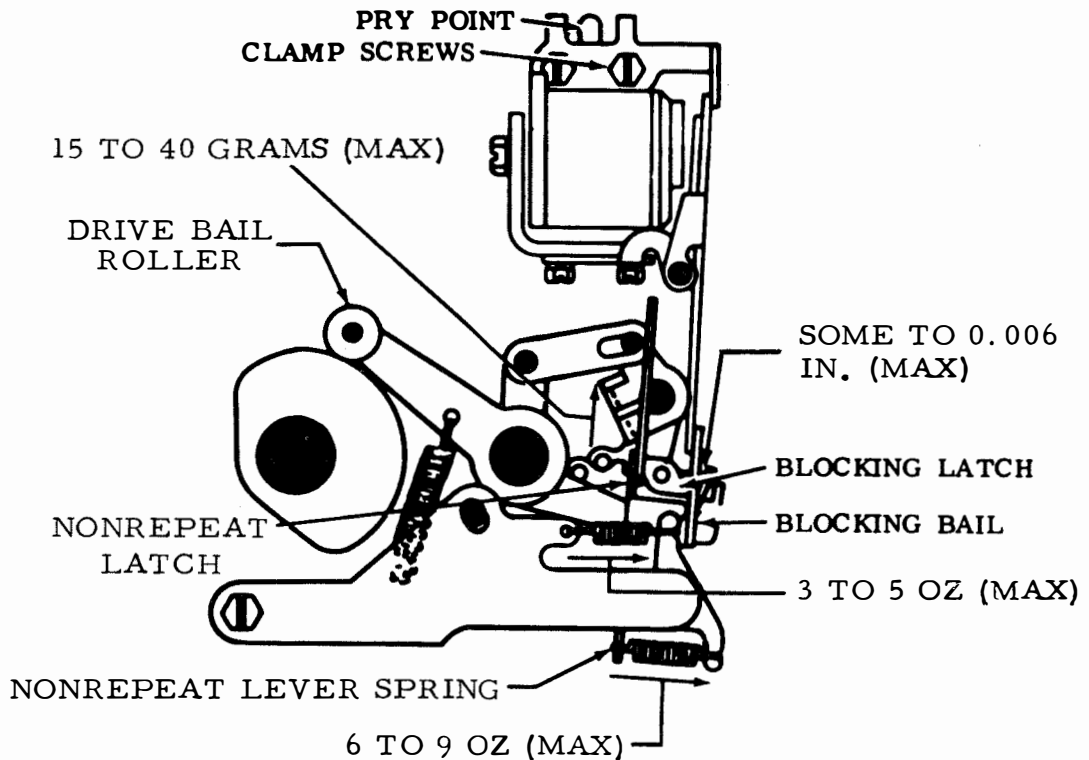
Blocking Latch Torsion Spring, Blocking Bail Spring, Nonrepeat Lever Spring, and Armature Backstop
